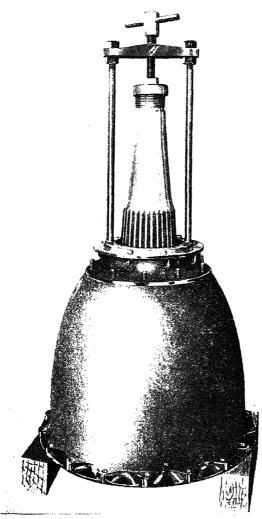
WITHDRAWING OIL TRANSFEE HOUSING FROM REDUCTION GEAR CASING.
